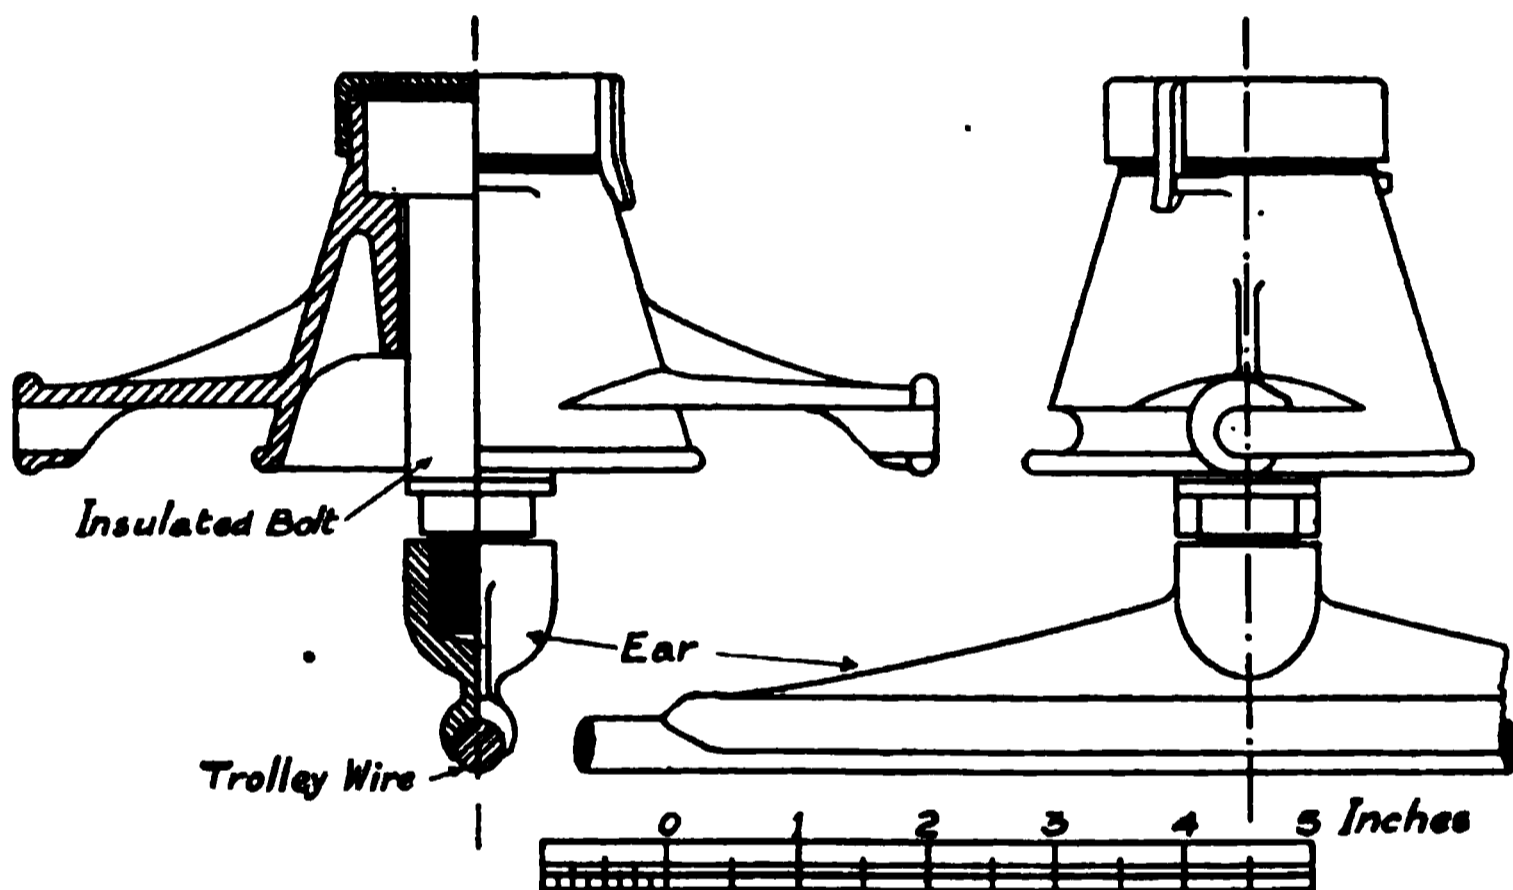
Straight-line Hanger with Insulated Bolt and Soldered Ear.
